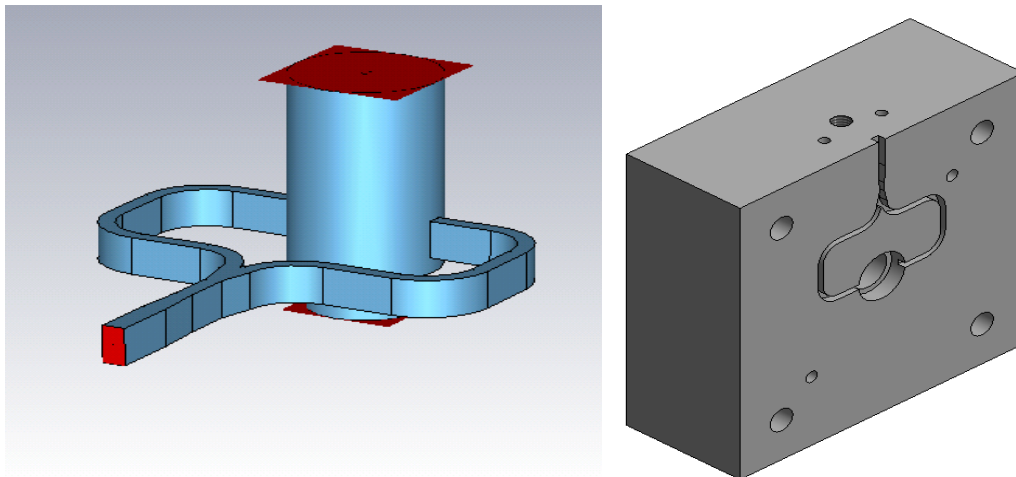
(L) A numerical model of the waveguide coupler and (R) a CAD model of a machined block from the prototype coupler.
